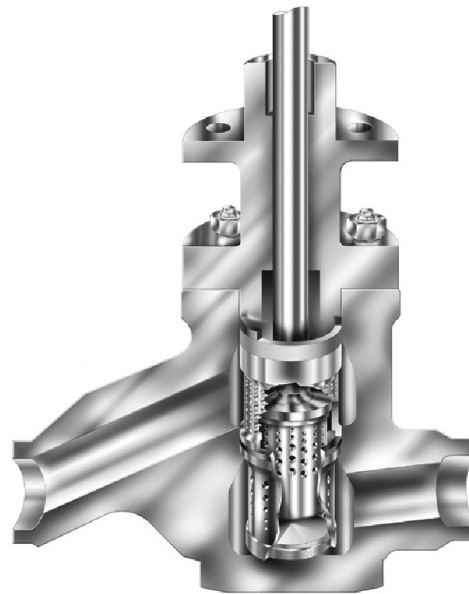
· Type RVG with three-stage plug, sectional drawing
